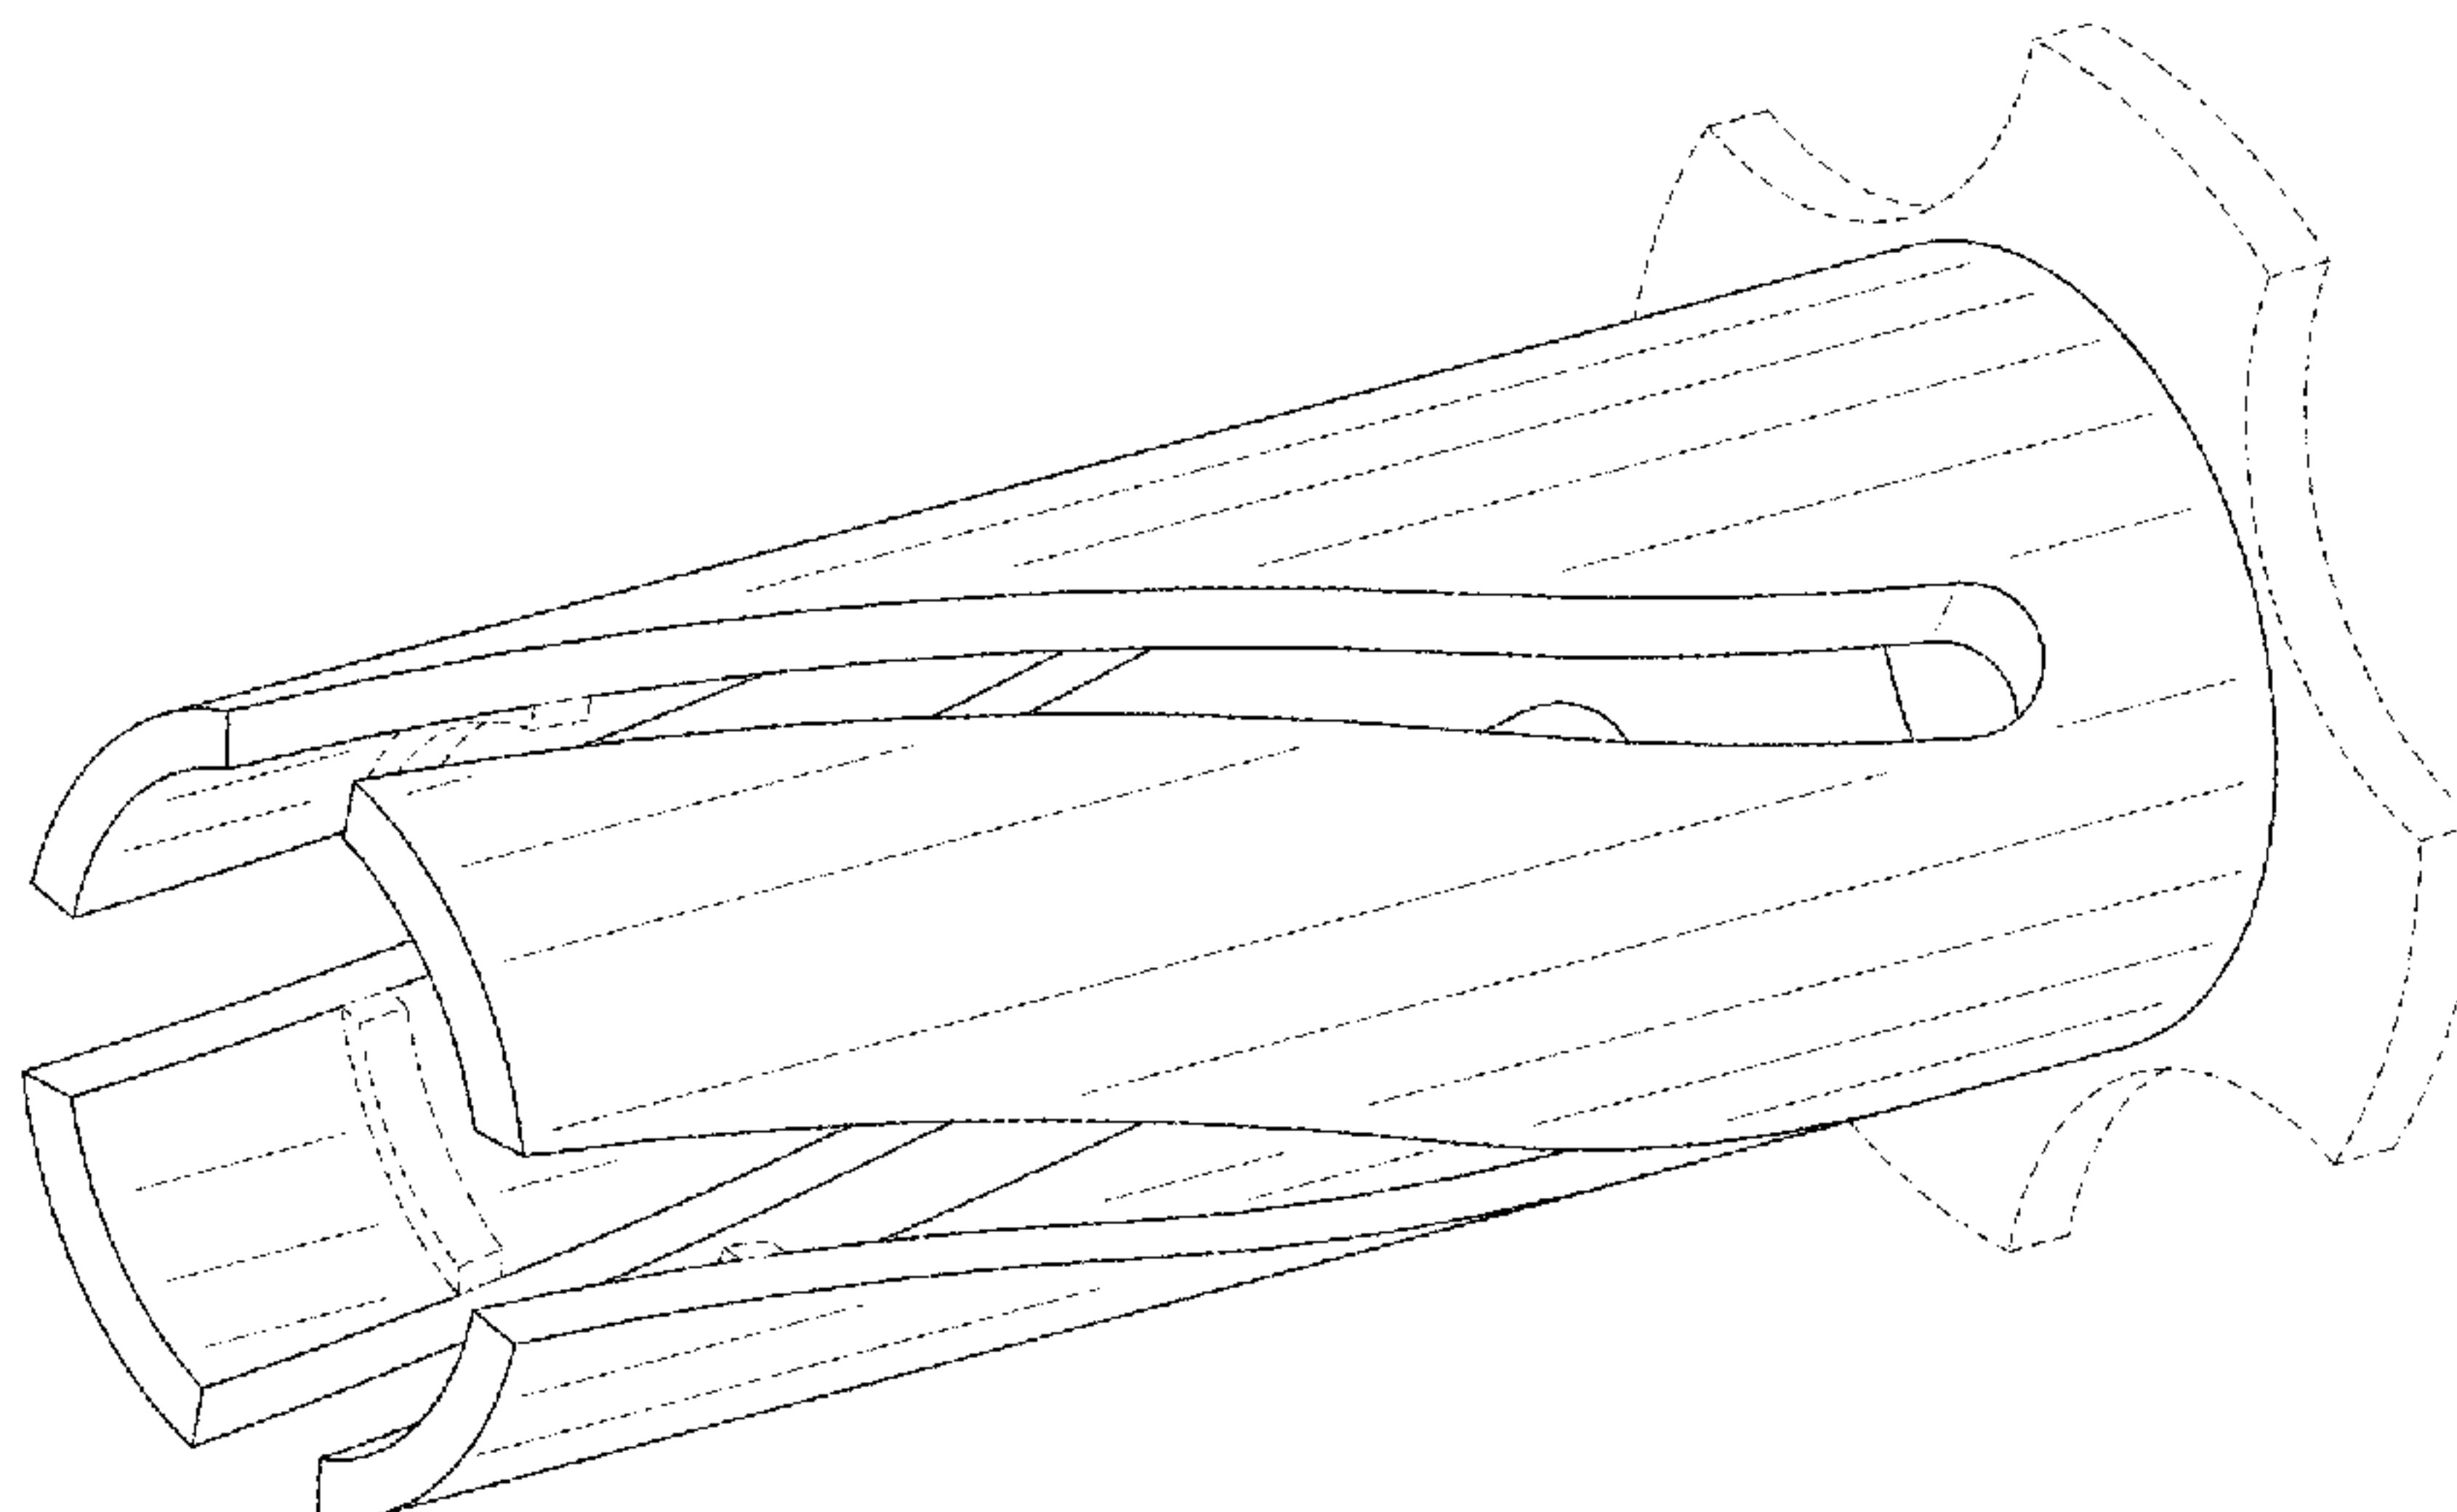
is a first side view of the anchor assembly sleeve of FIG. 1, the opposite second side view being a mirror image thereof.
